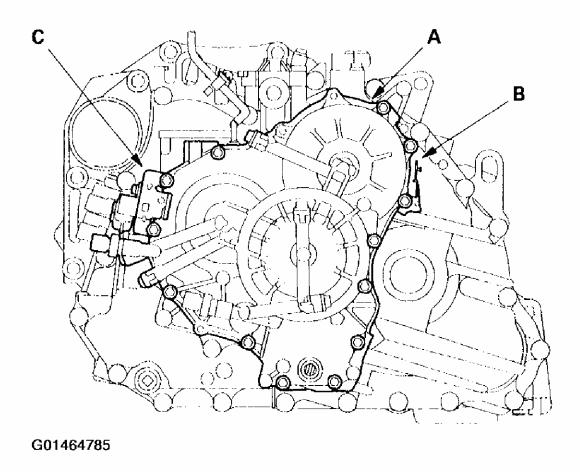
Installing The End Cover, Dowel Pins, O-Rings, Gasket, Harness Clamp Bracket & Connector Bracket Courtesy of AMERICAN HONDA MOTOR CO., INC.
